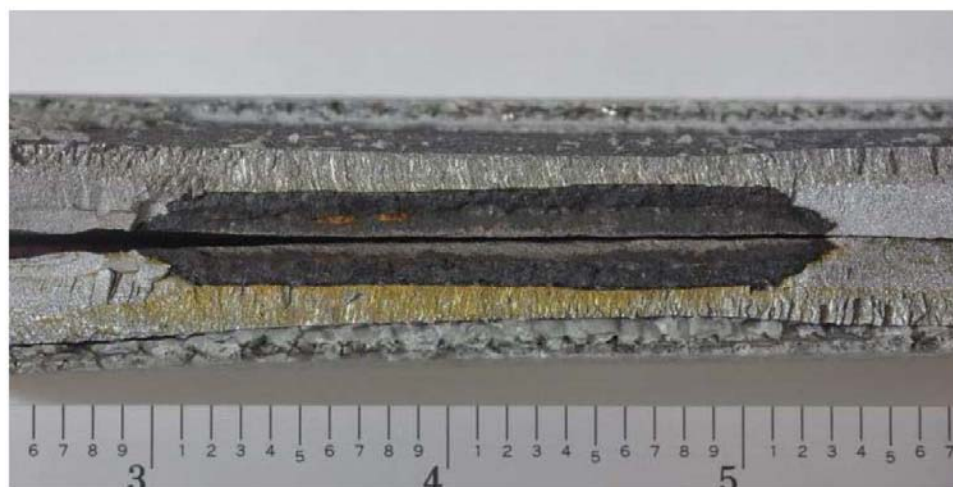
Post Flaw Inspection of EDM notch in Reinforced Sample (Failure Occurred outside Reinforcement)
